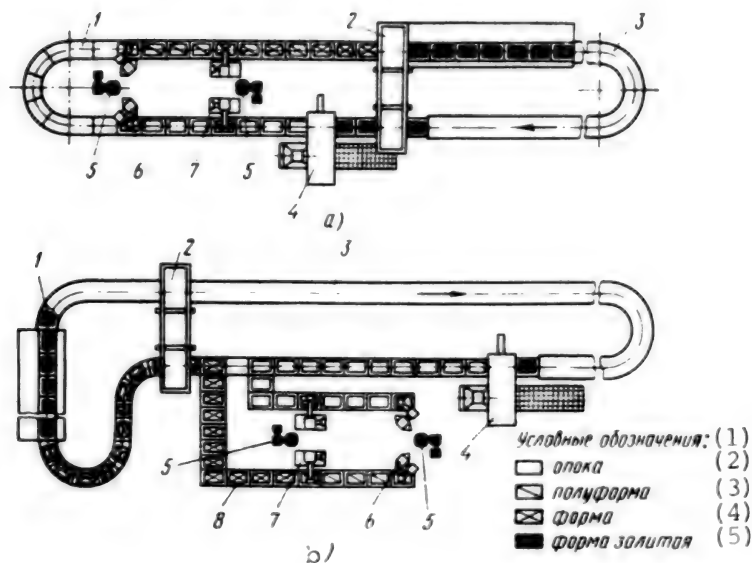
Automated Conveyor Foundry Lines for Manufacture of Castings in One-Time Sand Molds
